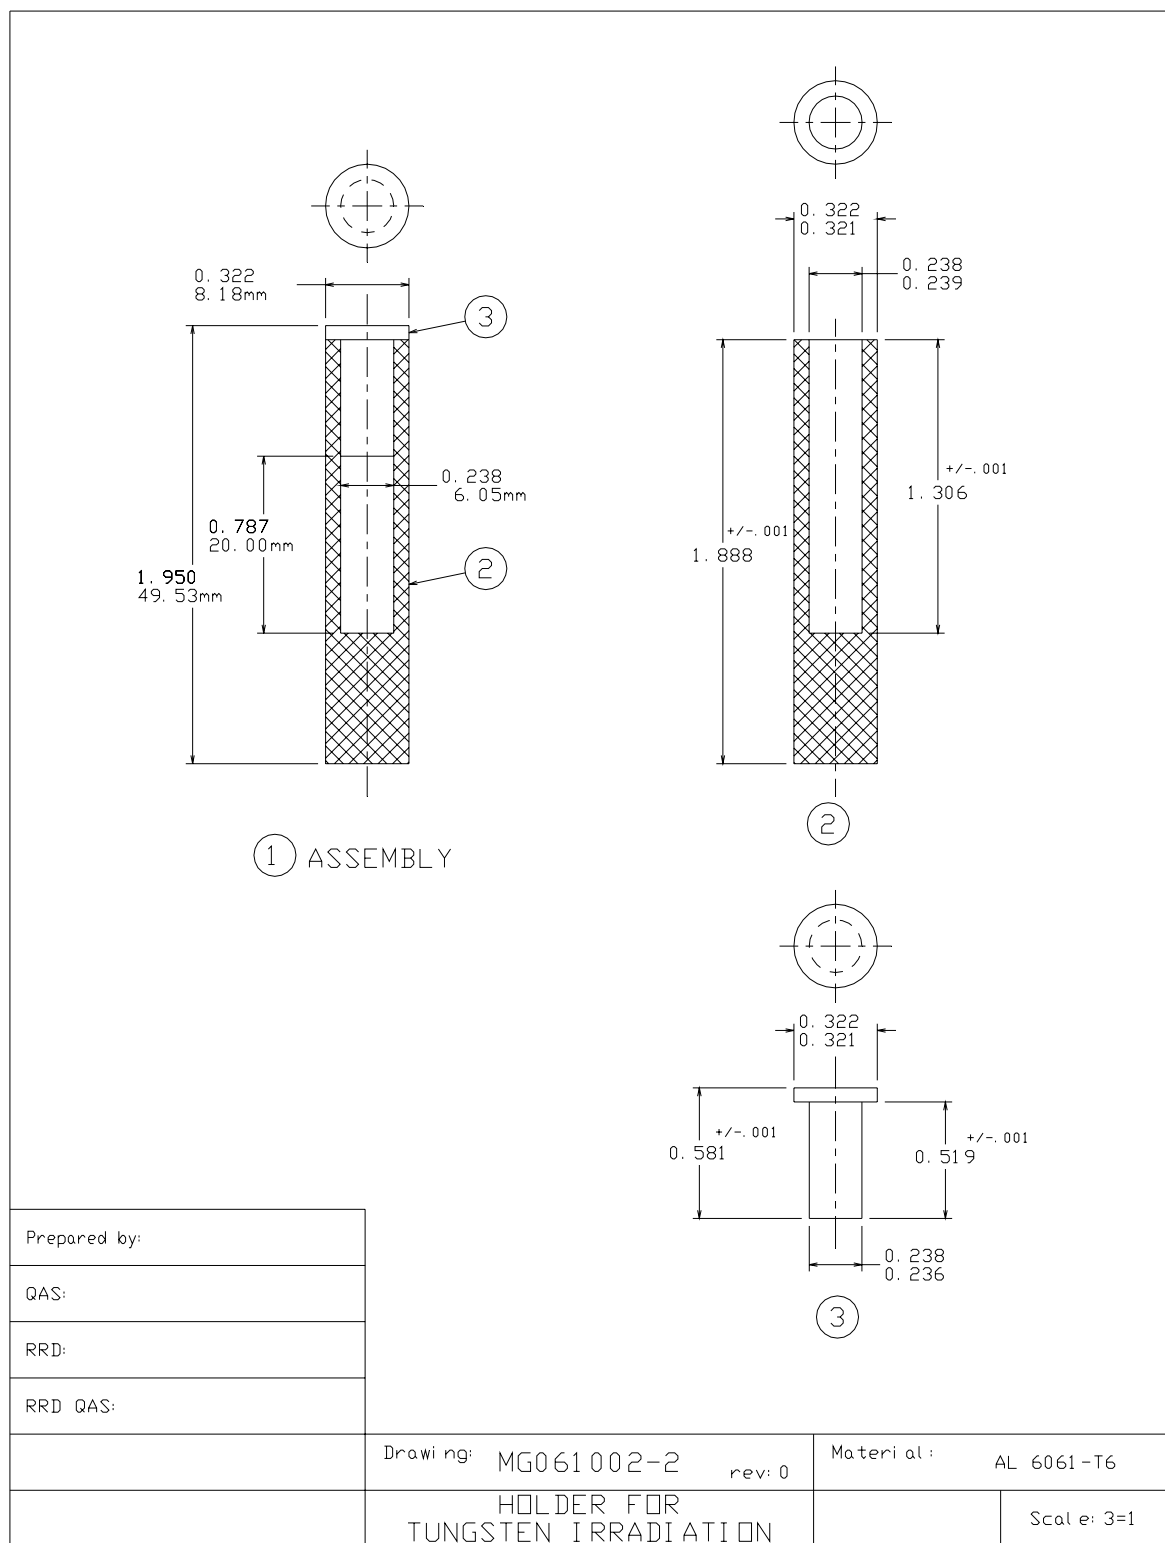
Aluminum Holder for Tungsten Cylinder Targets
